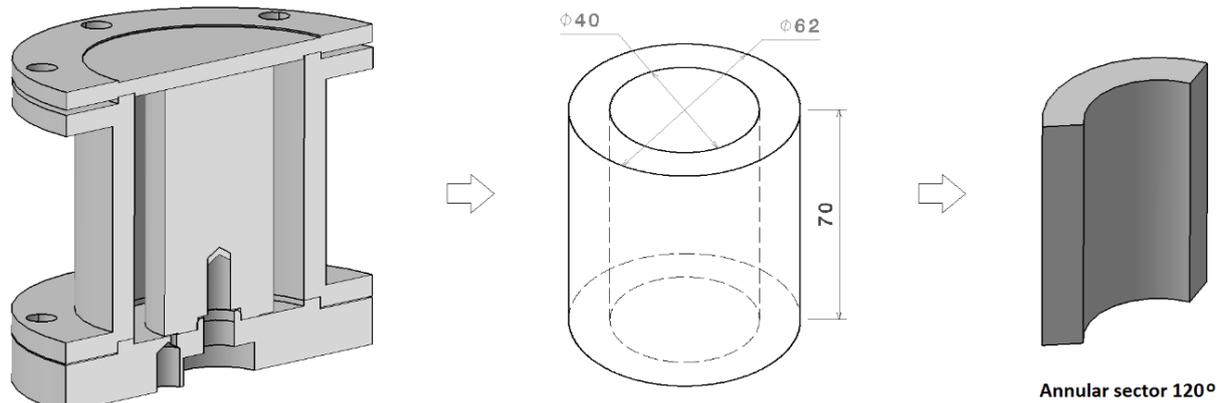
Geometry of heat insulator specimen and casting mold for its fabrication
